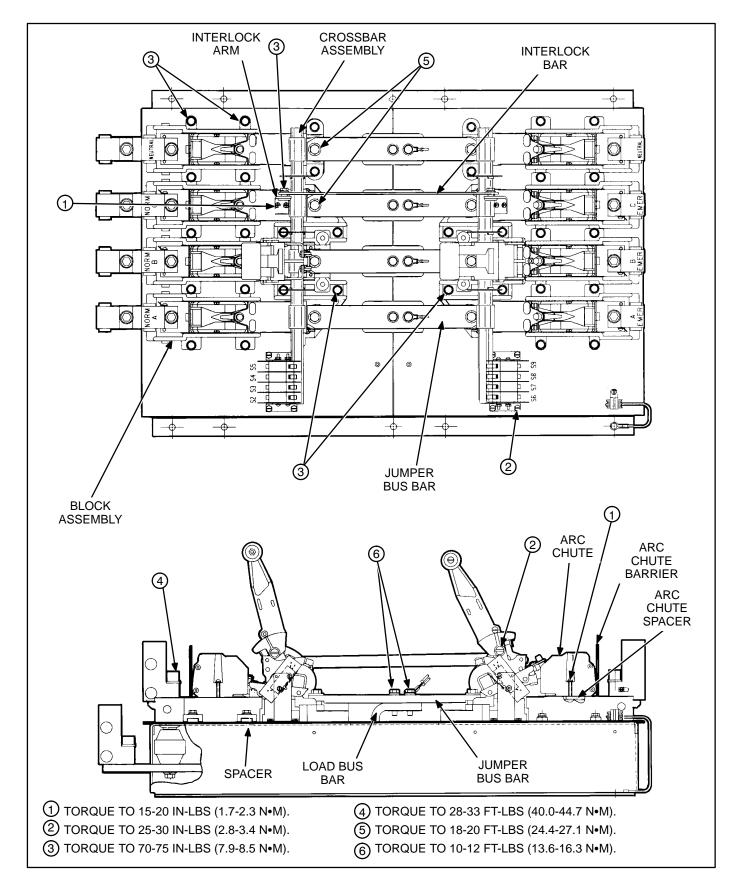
4-POLE SWITCH ASSEMBLY (800 - 1000 AMPERES)
